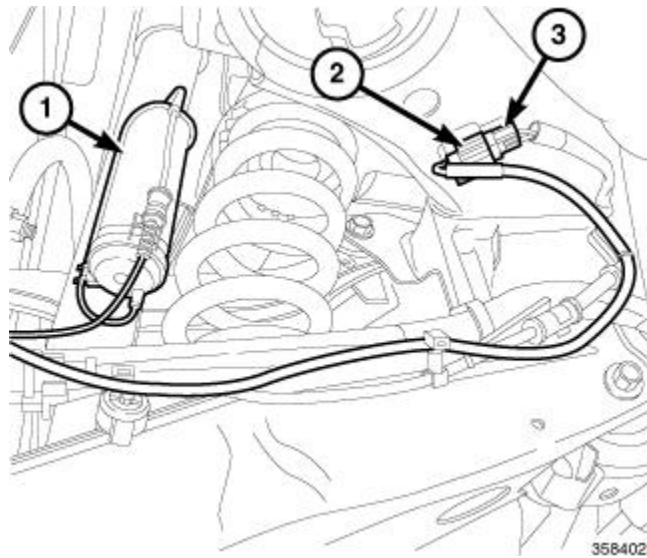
Shock Solenoid Assembly & ADS Harness Connector
